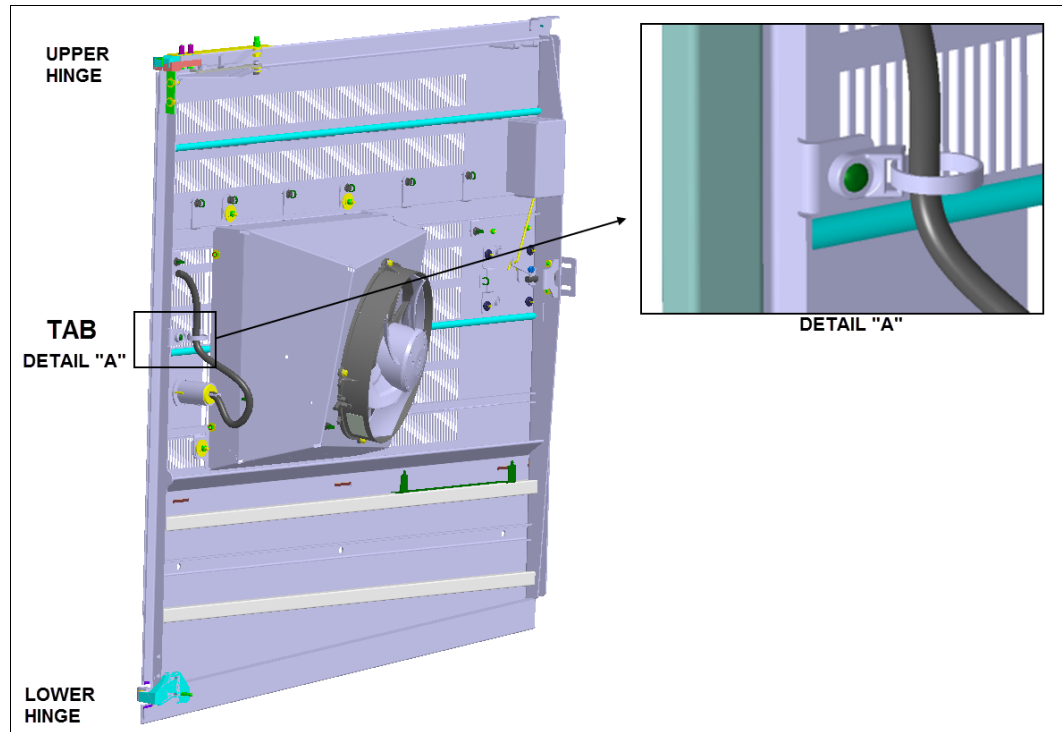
DOOR FRAME PART TO ADD REINFORCEMENT
